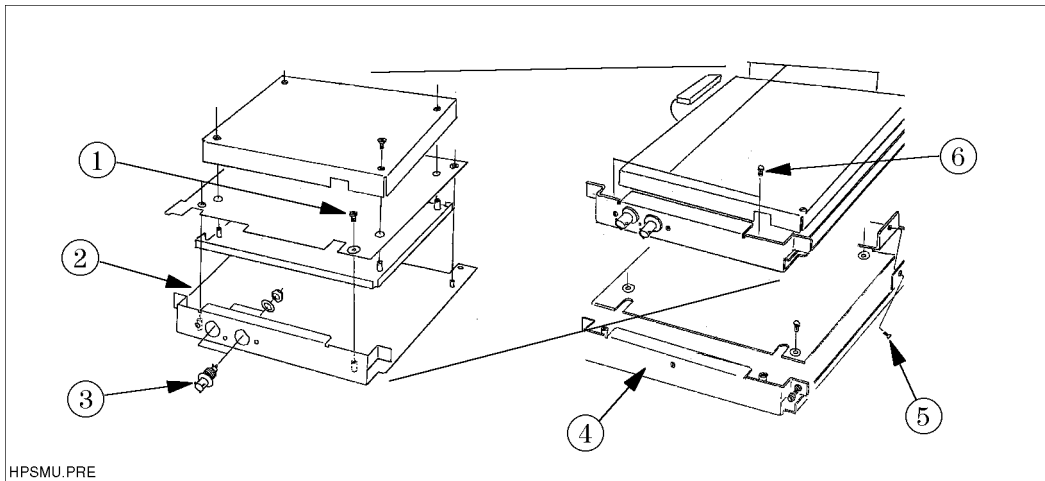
HPSMU Module (41501-61051) Parts Location
